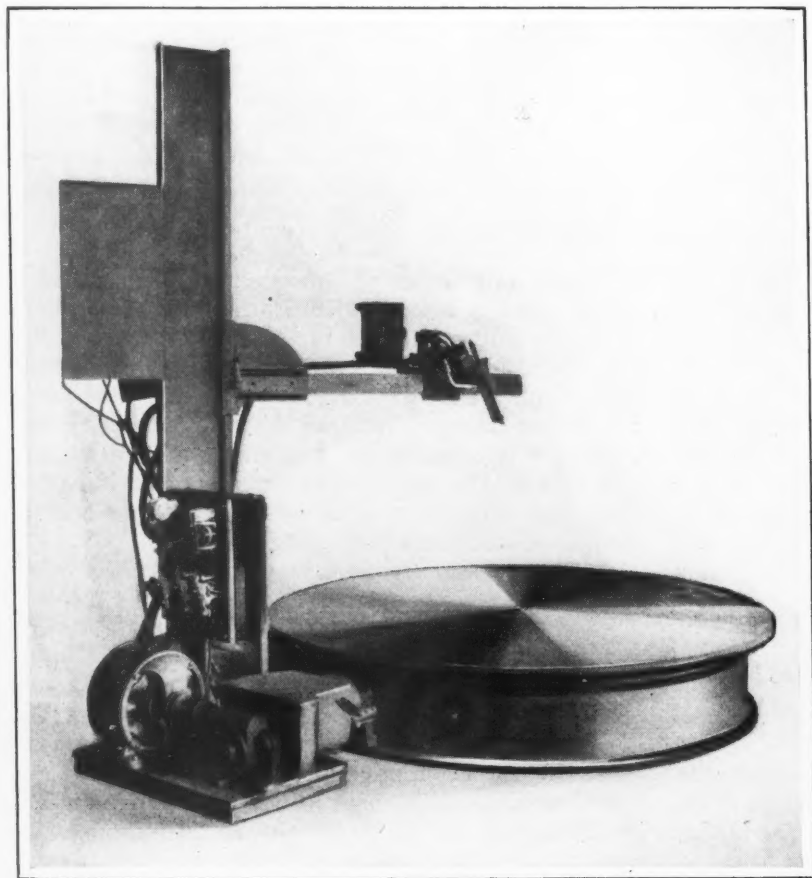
Automatic Welding Machine Having Circular Base and Table of Welded-steel Construction
